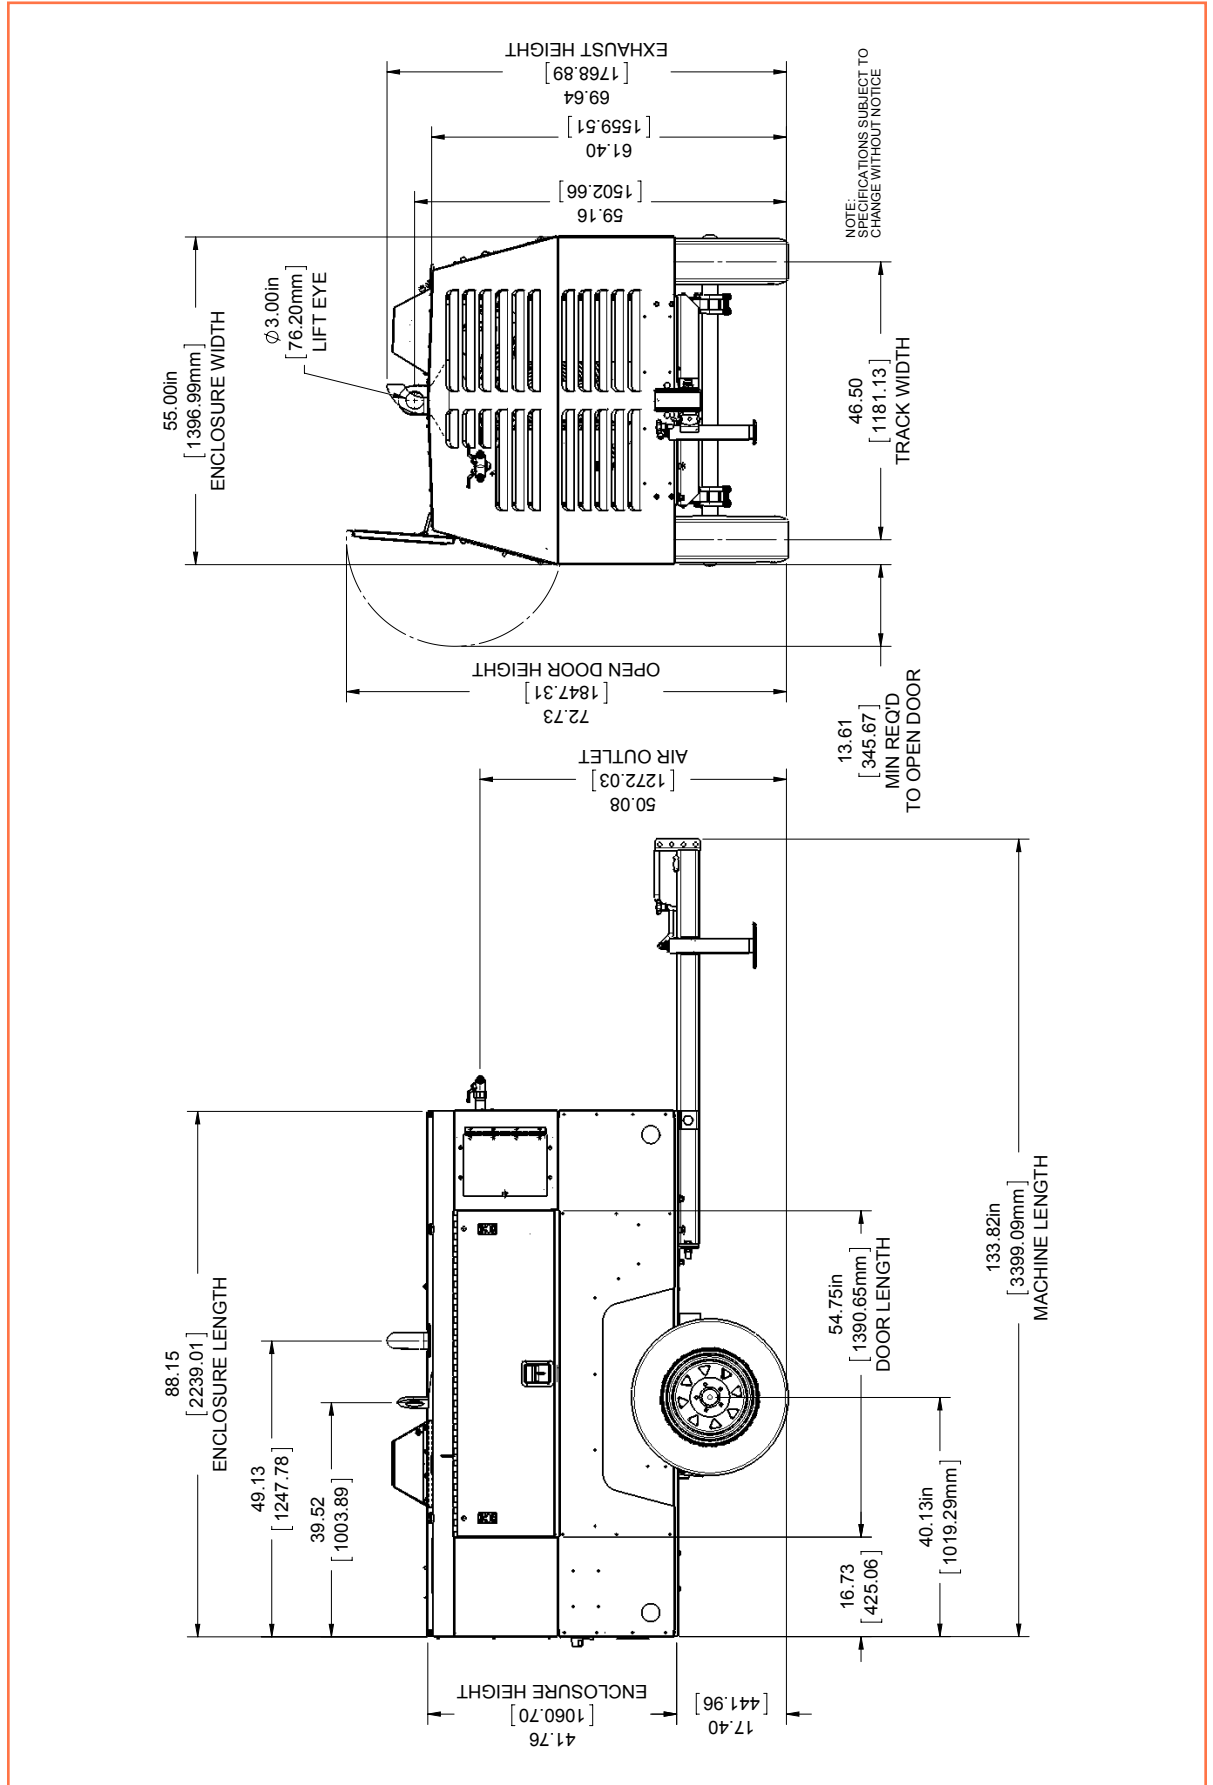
D185PDZ GENERAL DIMENSIONS 20140512
